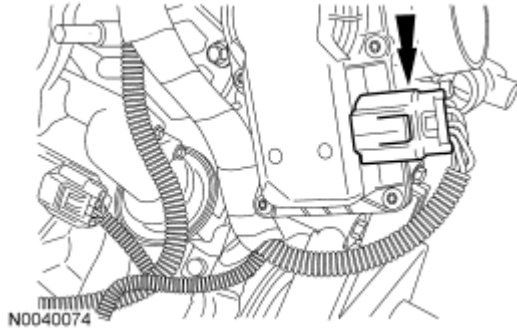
Locating Electronic Throttle Body Electrical Connector
